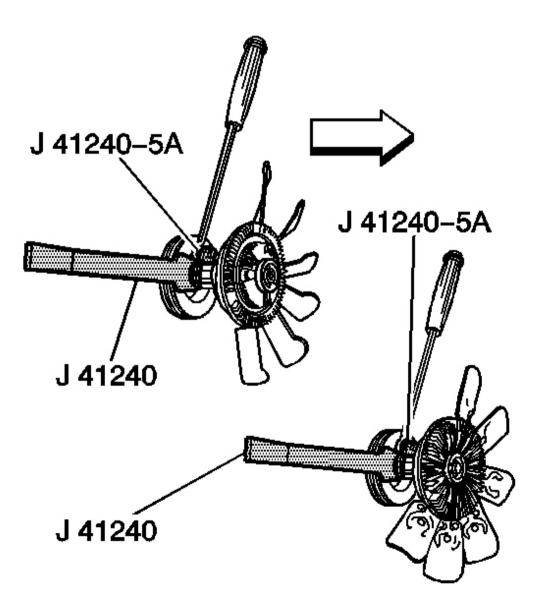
Using Special Tools For Fan Clutch Courtesy of GENERAL MOTORS CORP.
